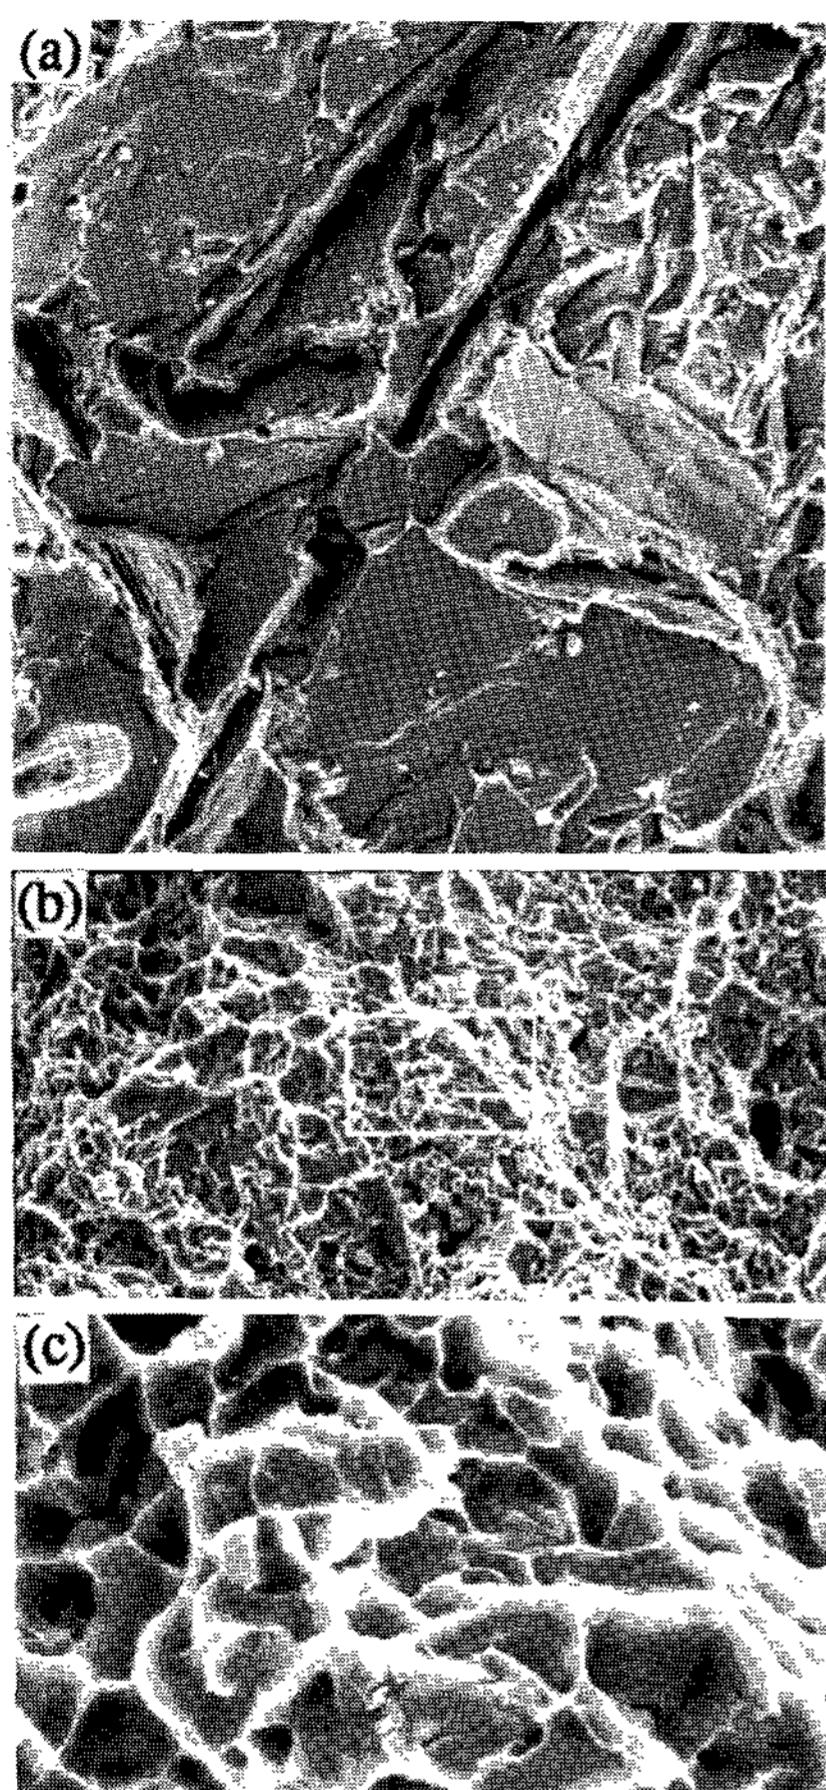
SEM fractography of fracture toughness test specimen with Sr contents.
